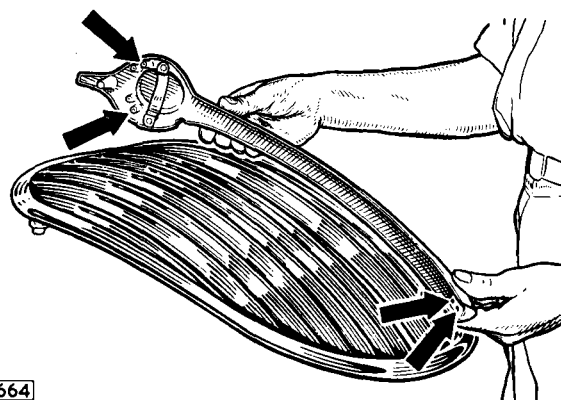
Removal of the centre chrome strip on the radiator grille.
